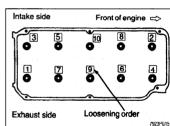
Cylinder head bolt loosening sequence—1.8L engine
